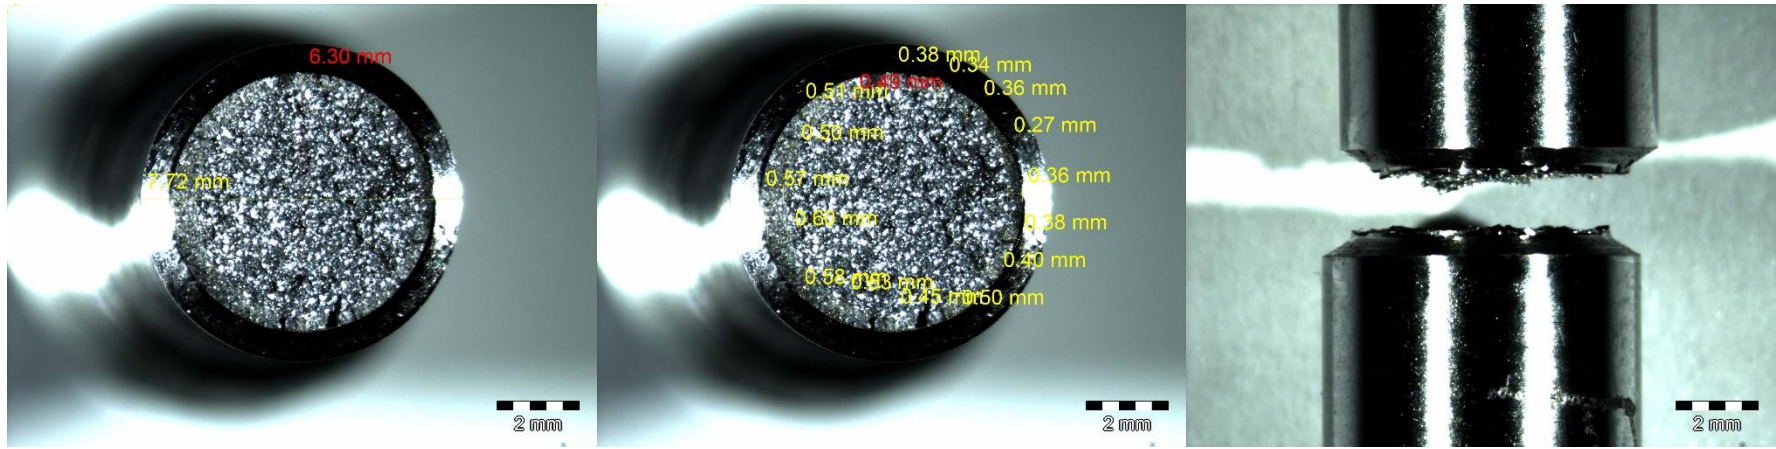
Cross-sectional and side view of fractured ECCRB-02
